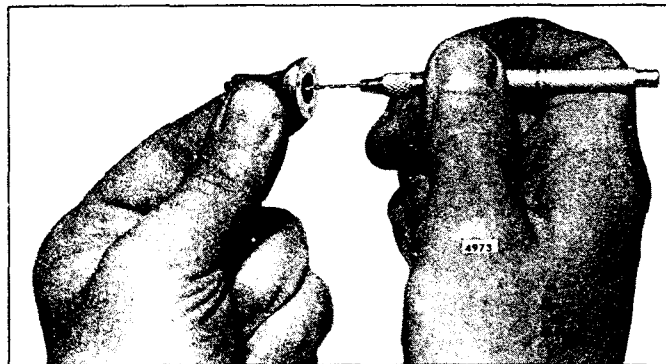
Cleaning Injector Spray Tip with Tool J 24838
